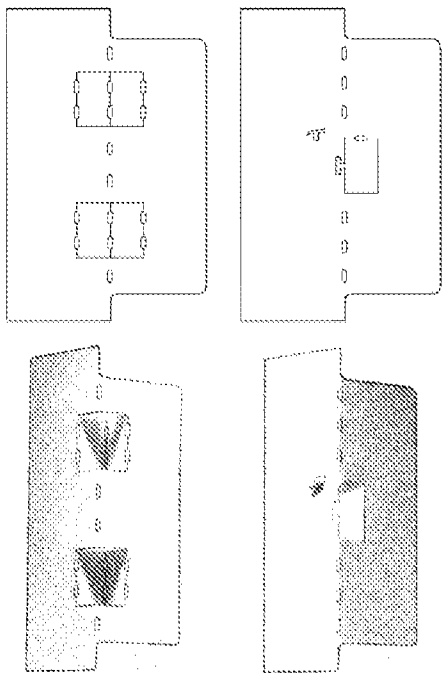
Methods to stabilize & shape flexible PCB without using additional components
